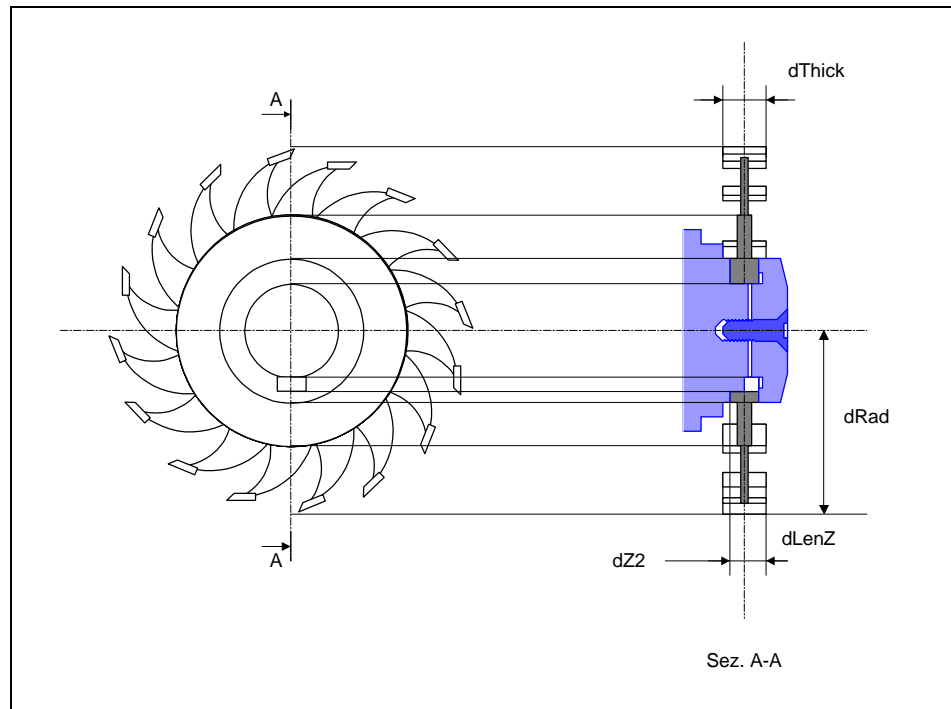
Configuration of a tool with opposed cutting edges that can be interchanged during the machining process (disk type cutter)
